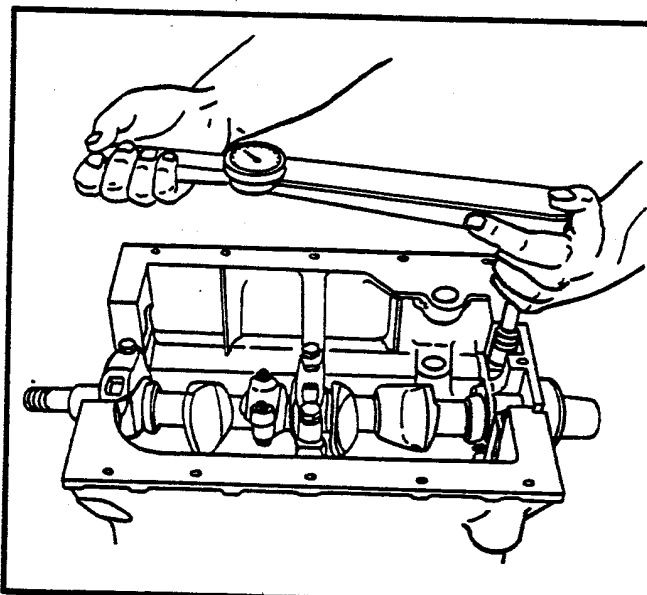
TIGHTEN BEARINGS TO PROPER TORQUE
